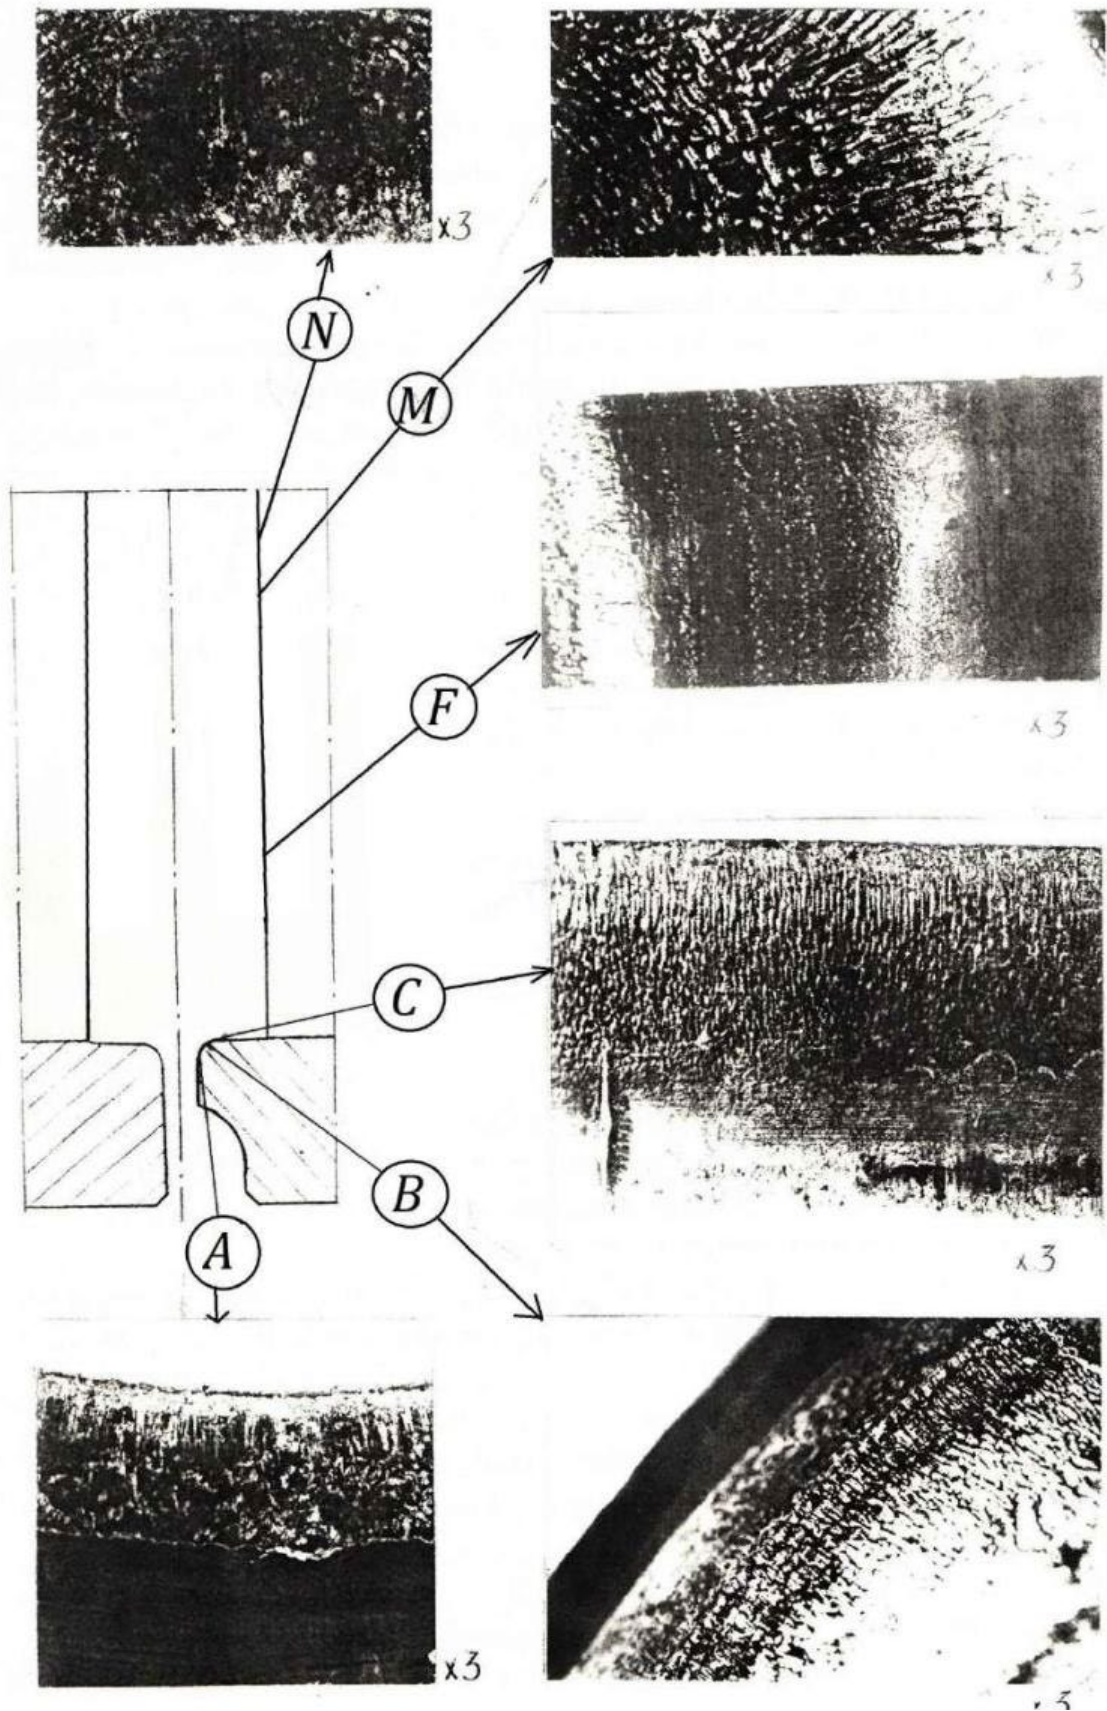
Wear of the body and striker, hardened by welding alloy "Hastelloy"
